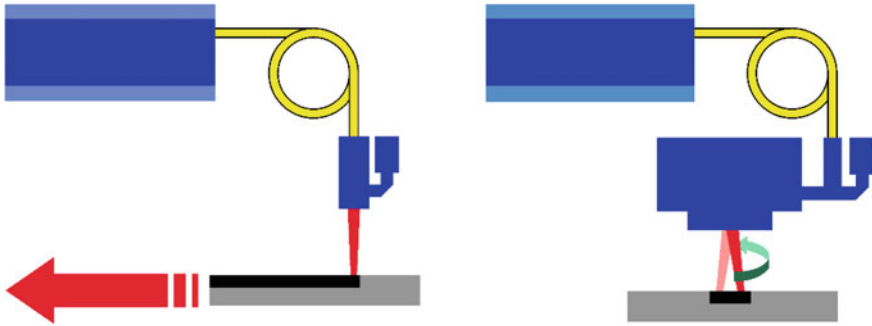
Movement of laser beam for microwelding: fixed optics (left) and galvanometer scanner (right)
